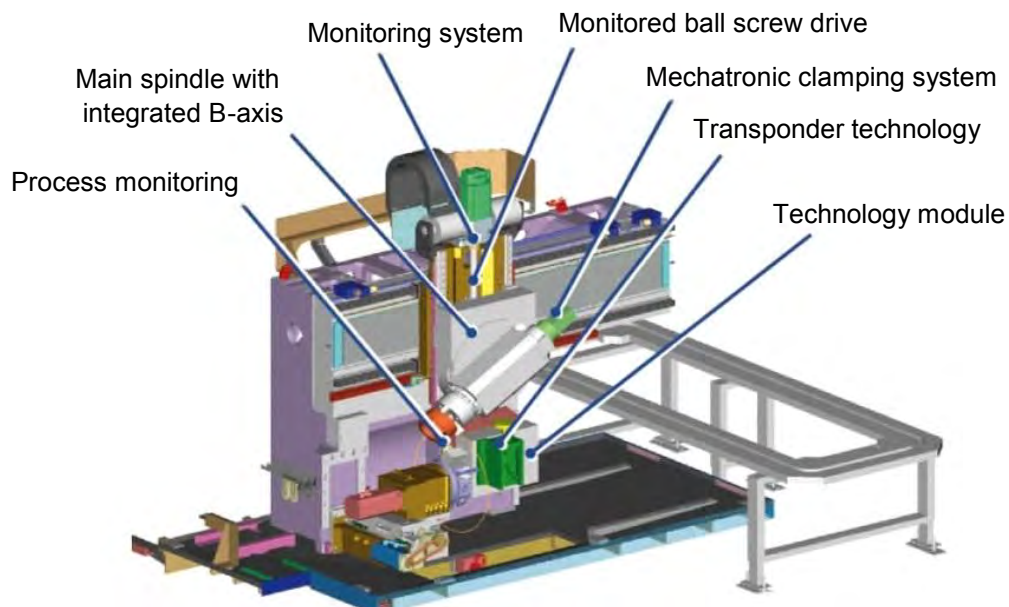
Machine tool demonstrator - a lifecycle oriented tool²⁰²
